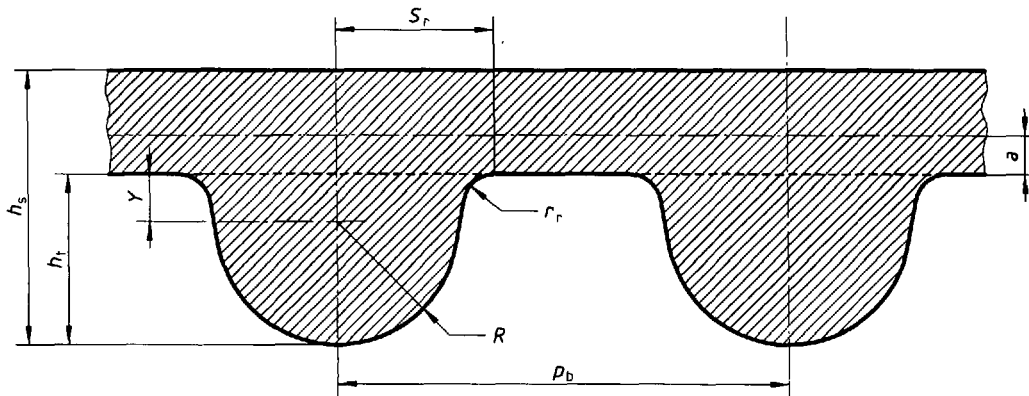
Nominal tooth dimensions (profile) for types ZH and YH
